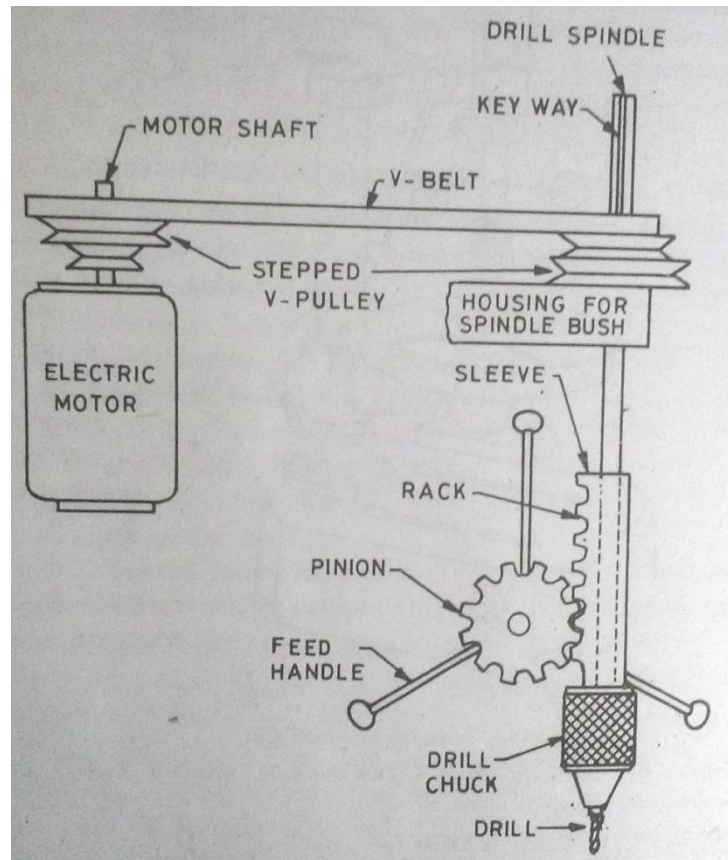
Drive mechanism of a sensitive drill machine.
